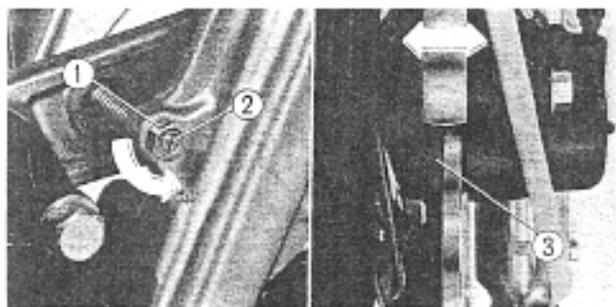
① Lock nut ② Adjusting bolt ③ Pad B
